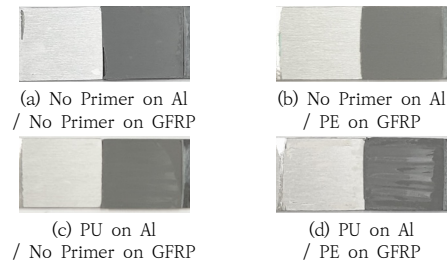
Fractured surfaces of specimens where aluminium and GFRP are not sanded
